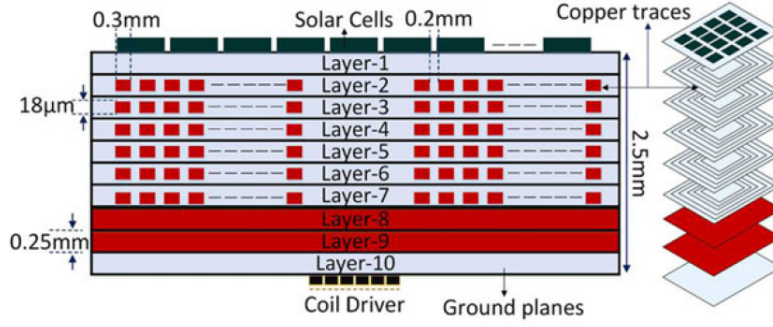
Cross sectional view of PCB embedded magnetorquer and layer arrangement [8]
